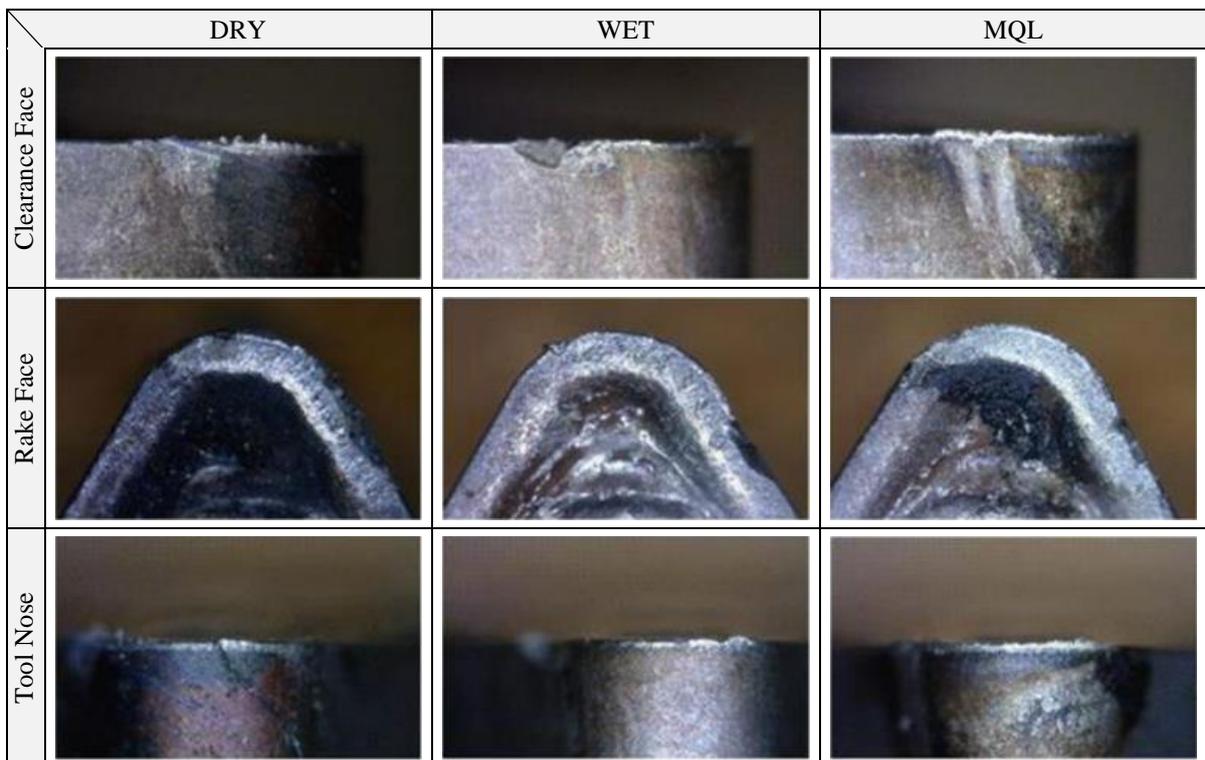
Carbide at the end of tests in the three lubricooling conditions with  $v_{c2} = 80$  m/min.
